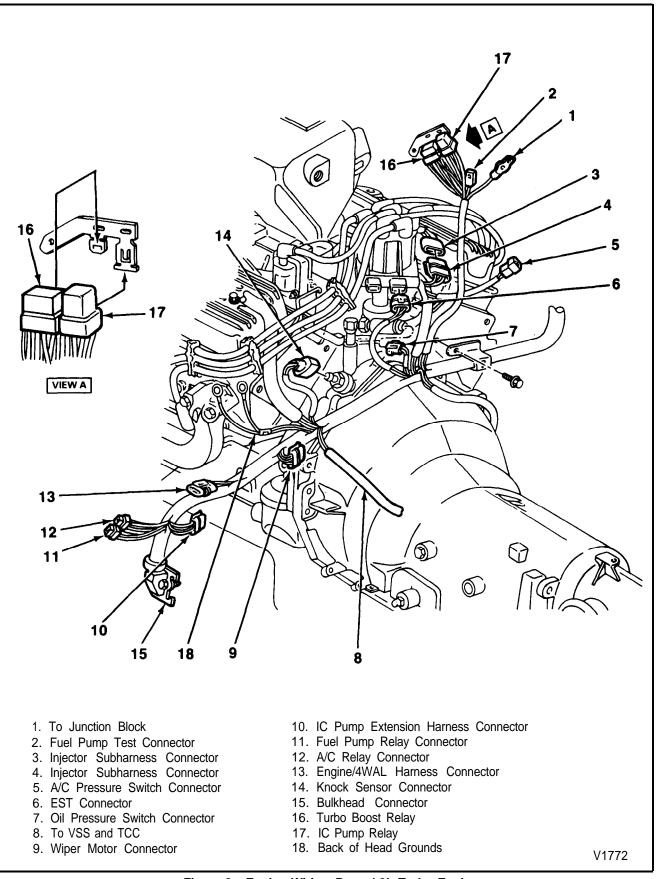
Engine Wiring-Rear-4.3L Turbo Engine
